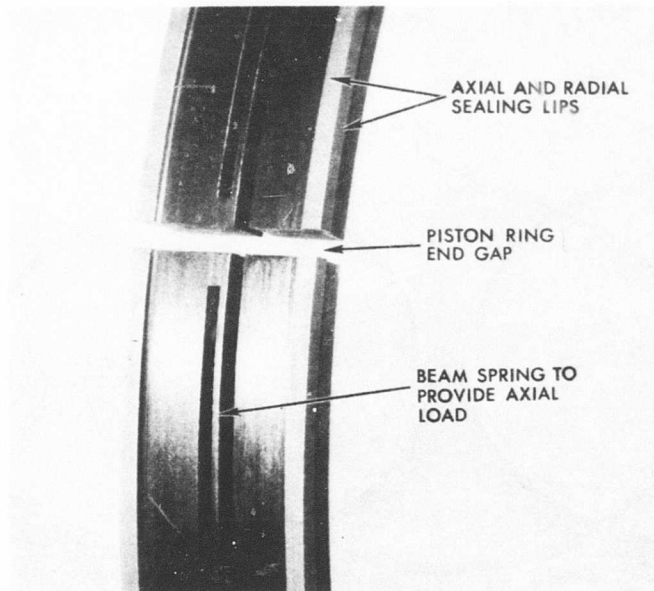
Regenerator I.D. Ring Seal, All-Metal Simplex Seal Showing Axial and Radial Sealing Lips, Piston Ring End Gap and Beam Spring.
